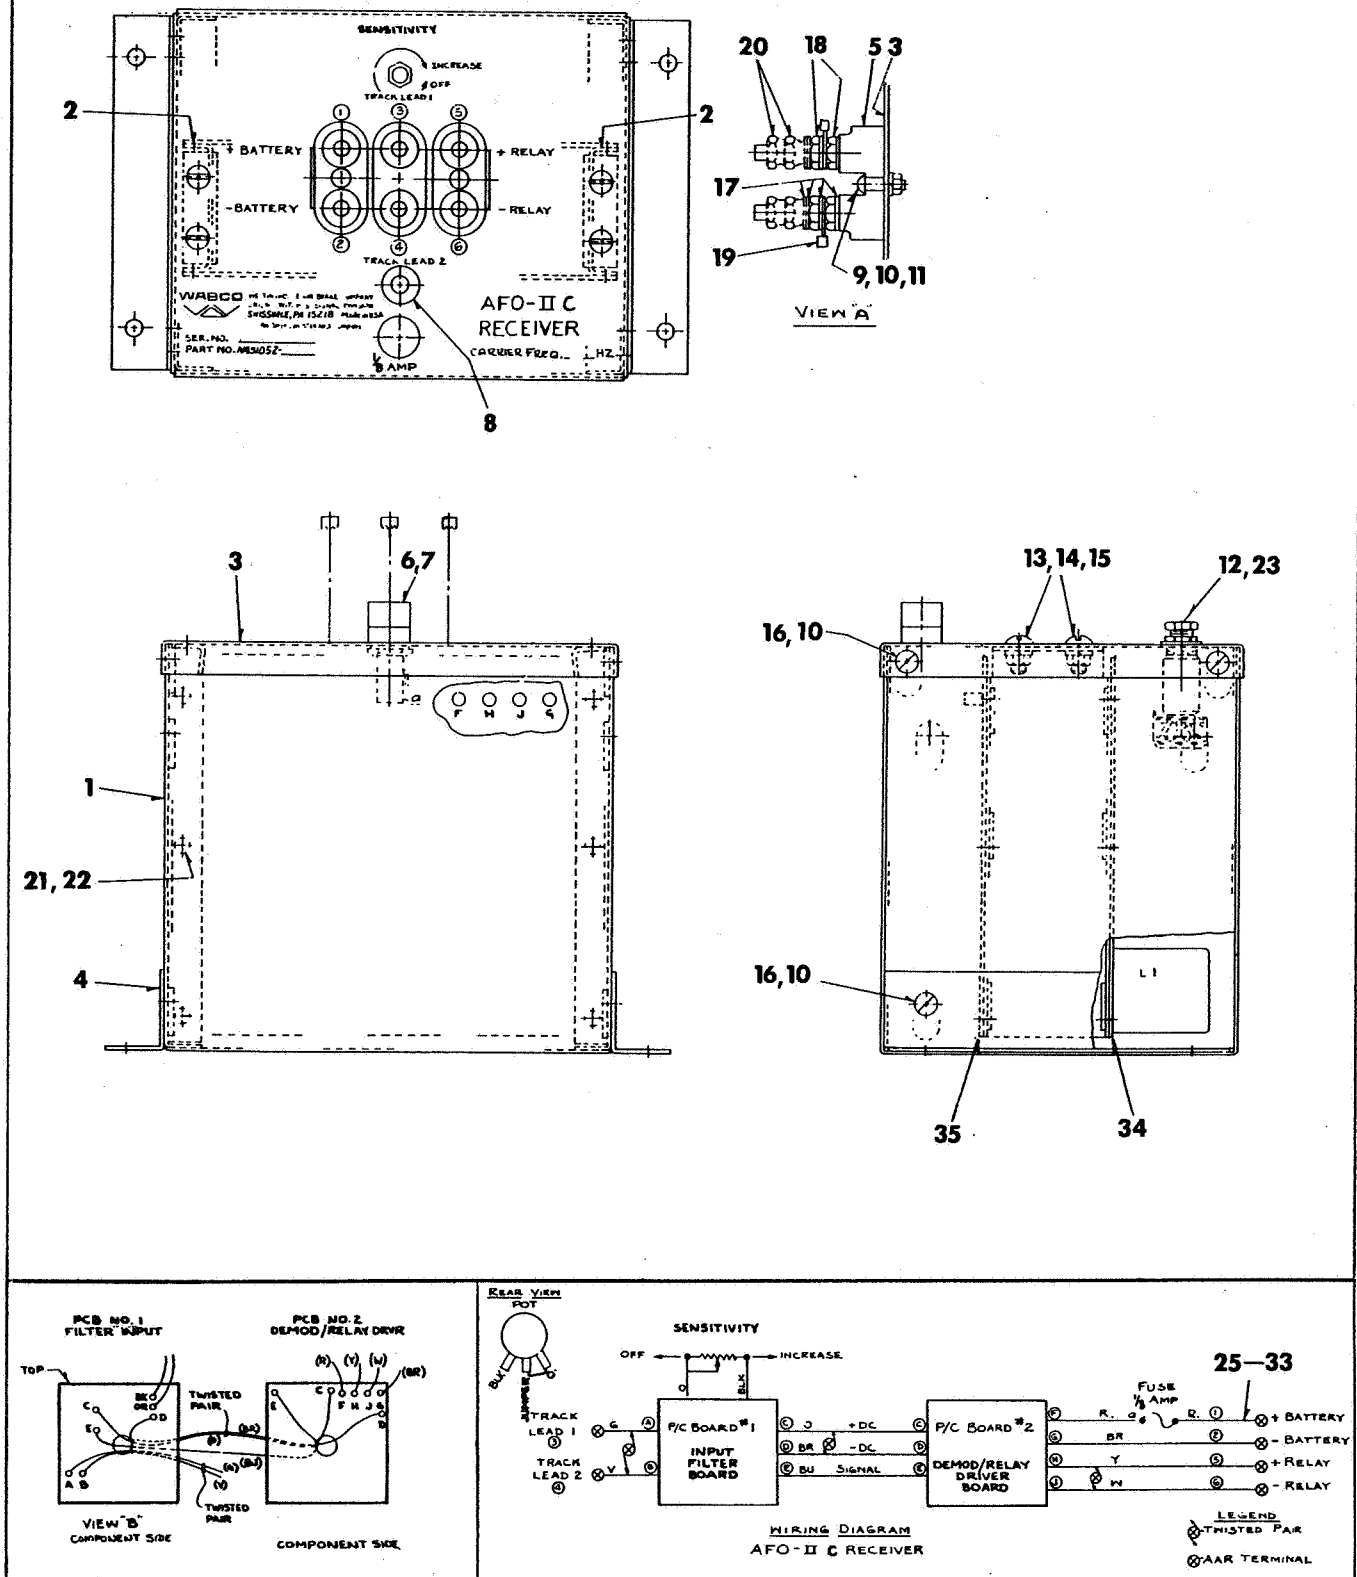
AFO-IIC Receiver Basic Assembly and Chassis Wiring
